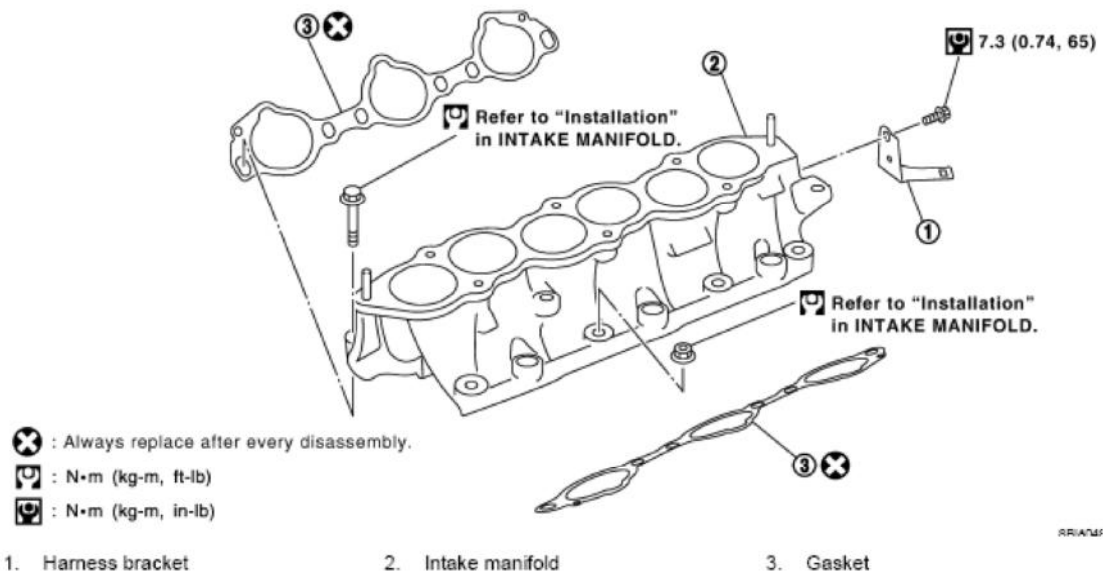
Identifying Intake Manifold Components With Torque Specifications
